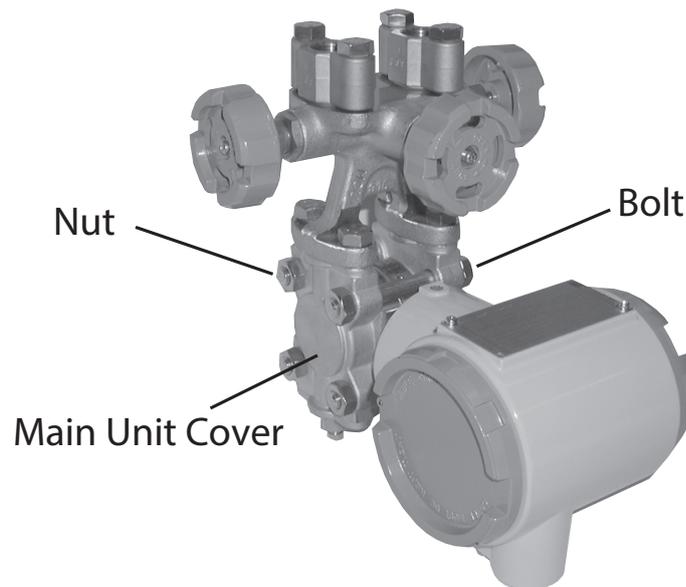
Nuts and Bolts Fastening the Main Unit Cover
